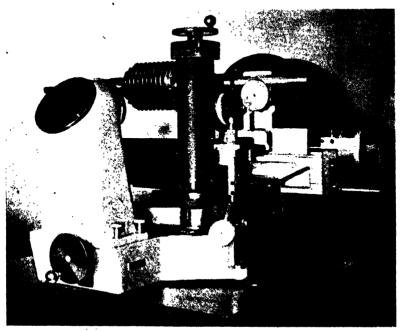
Checking a Gear Hob on a Hilger Projector 233
